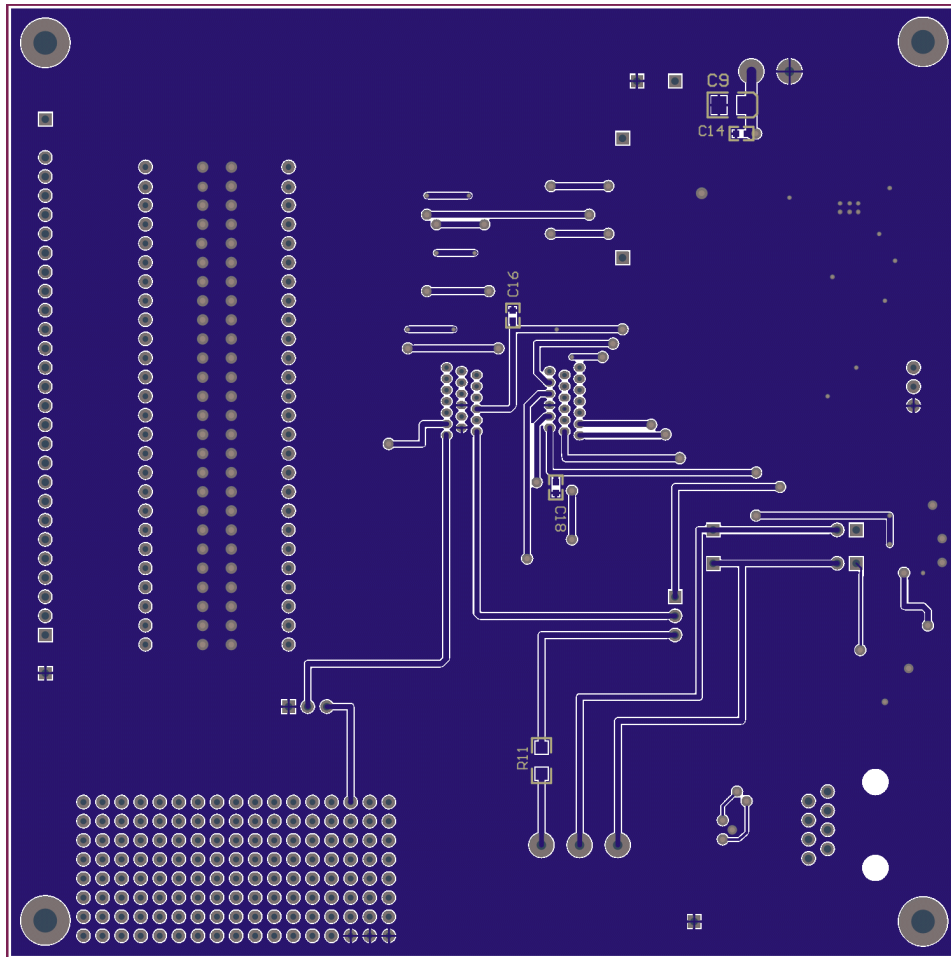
BUF22821EVM PCB Bottom Layer (Solder Side)
